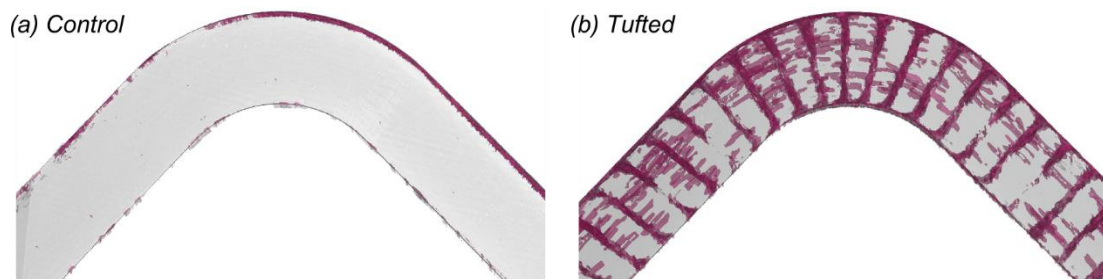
Images from CT scans of as-manufactured control (a) and tufted (b) L-section specimens through full specimen width, showing defects highlighted by dye penetrant in pink.
